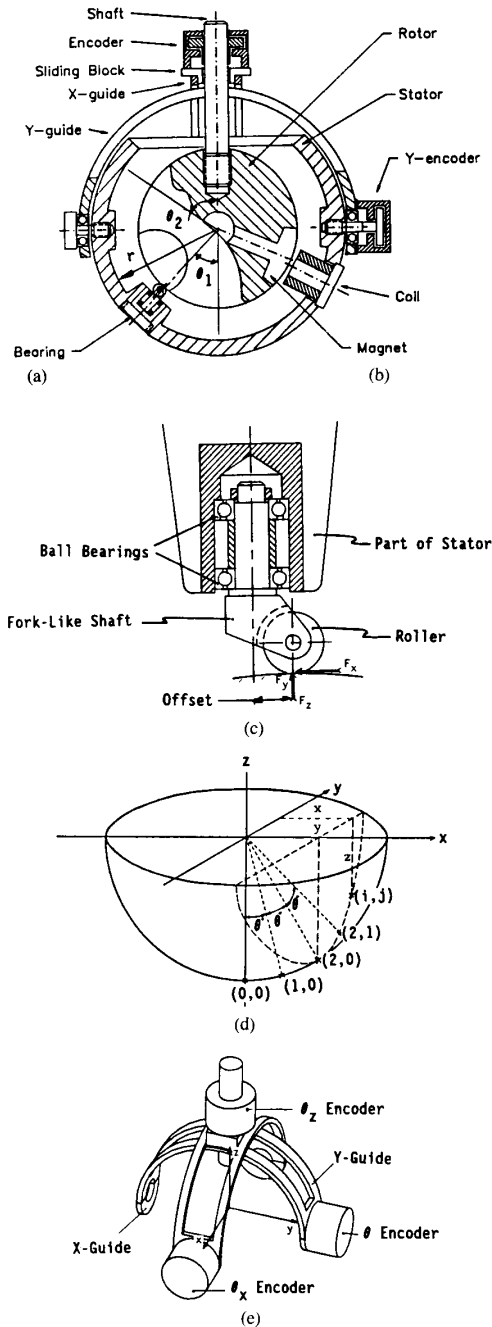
(a), (b) Fundamental structure of prototype spherical stepper. (c) Schematic illustrating bearing assembly. (d) Schematic illustrating coil arrangement. (e) Schematics illustrating measurement system.
